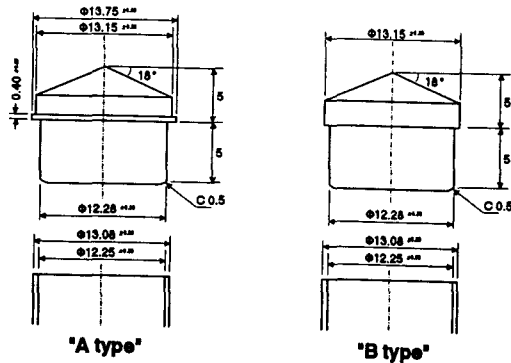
Joint geometry of experimental specimen for end cap welding
